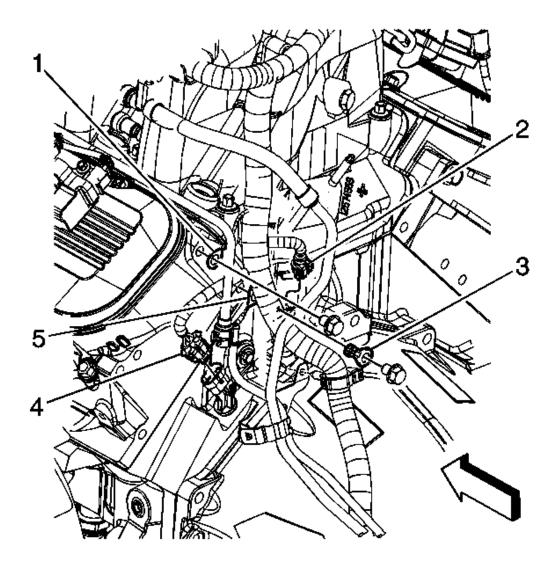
View Of Engine Harness Grounds And CKP Sensor And Oil Pressure Sensor Electrical
